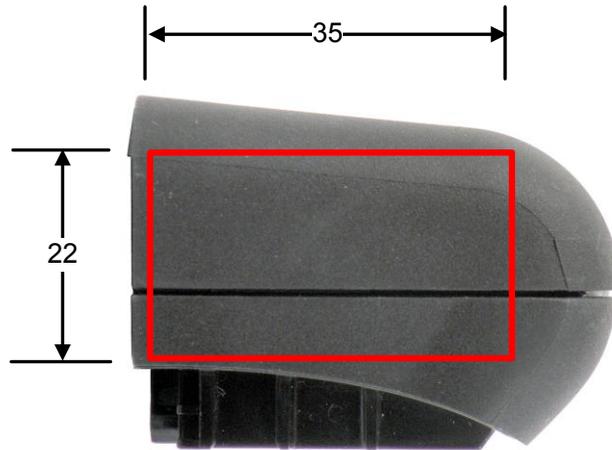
Battery Adapter Flexspace Horizontal Dimensions
